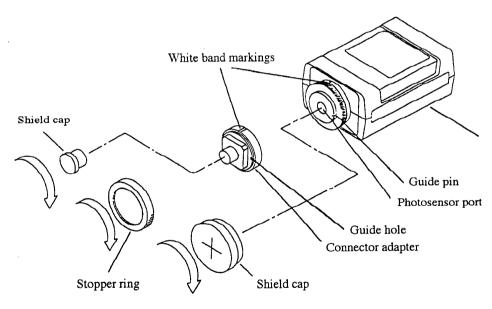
Mounting the Shield Cap and Connector Adapter
